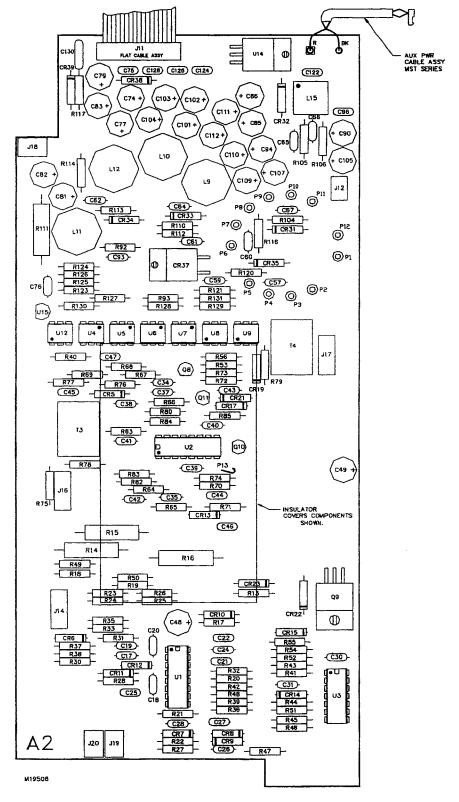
COMPONENT LOCATION OF MST ASSEMBLY A2
